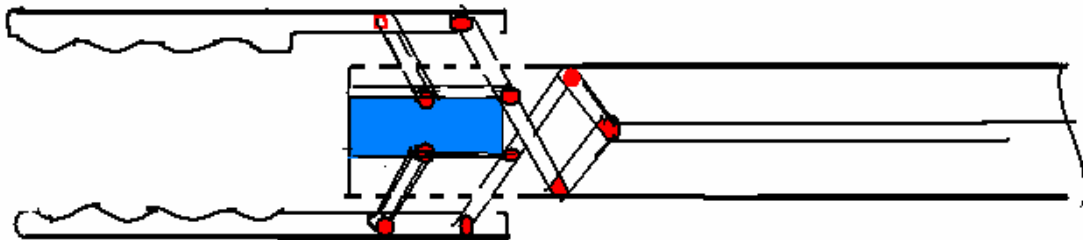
Figure jaw mechanical structure (cross section view) Connections highlighted in red are pivot points.
